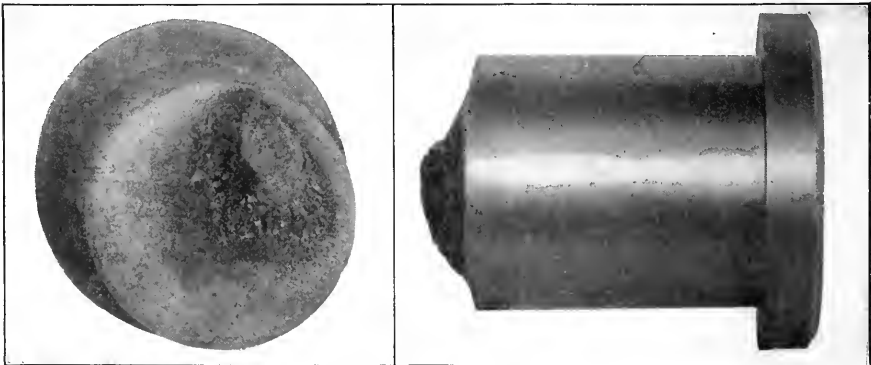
TWO VIEWS OF BROKEN CRANKPIN
